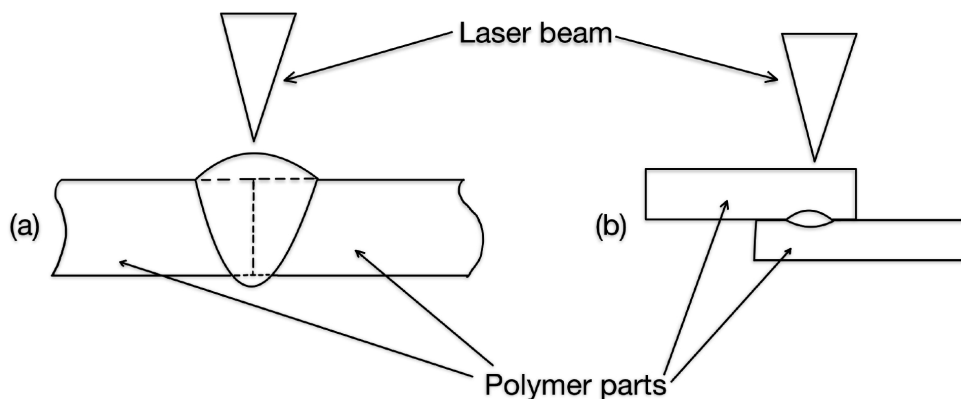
Scheme of direct laser welding a) and transmission welding b) based on [3]
